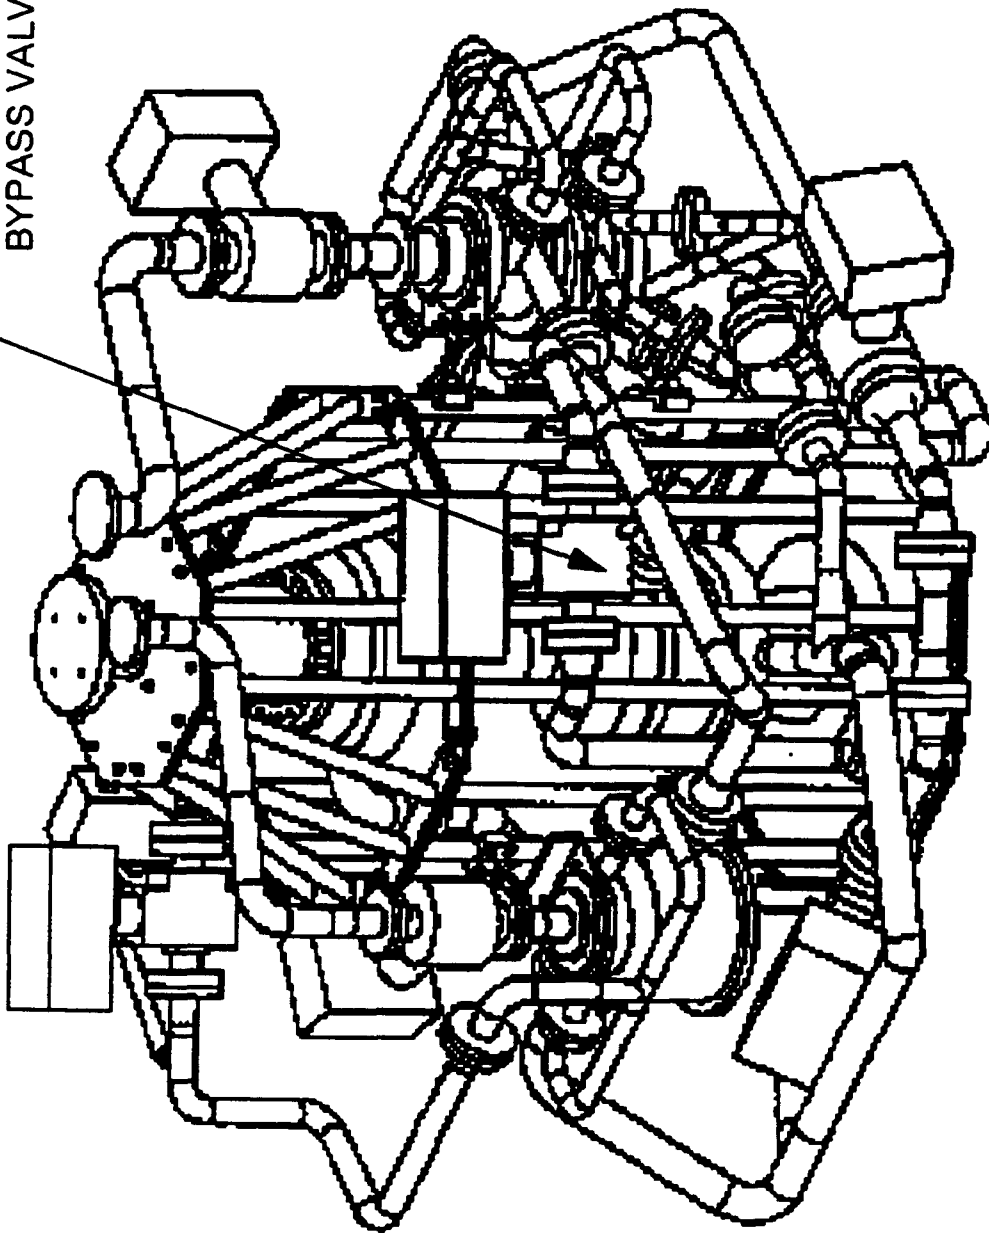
High Mixture Ratio Demonstration Adds Fuel Turbine Bypass Valve
